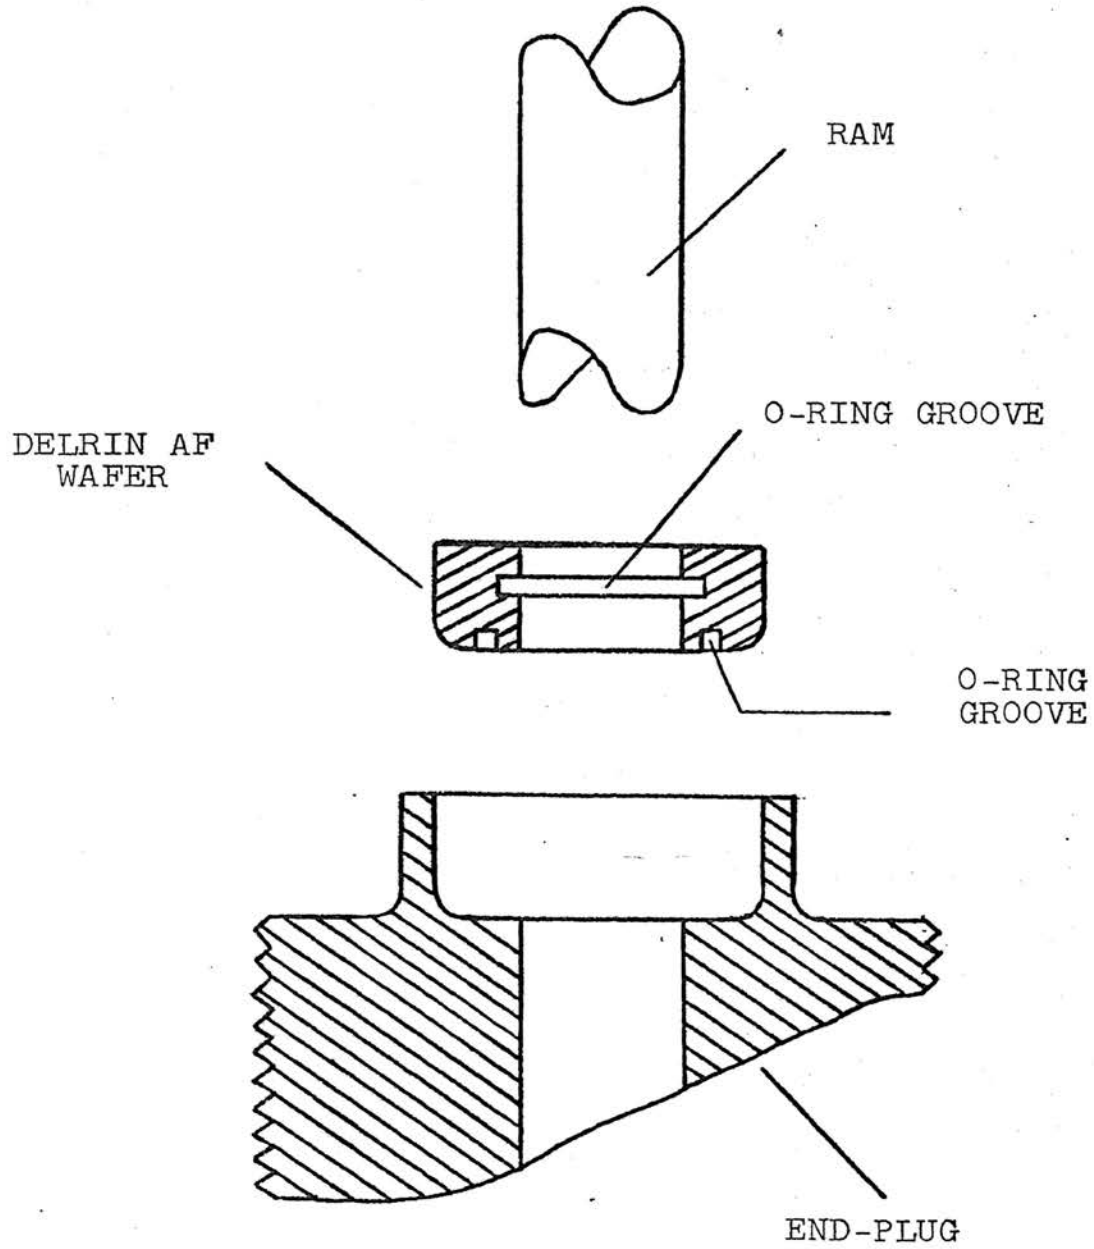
UPPER END-PLUG AND RAM SEAL SCHEMATIC
